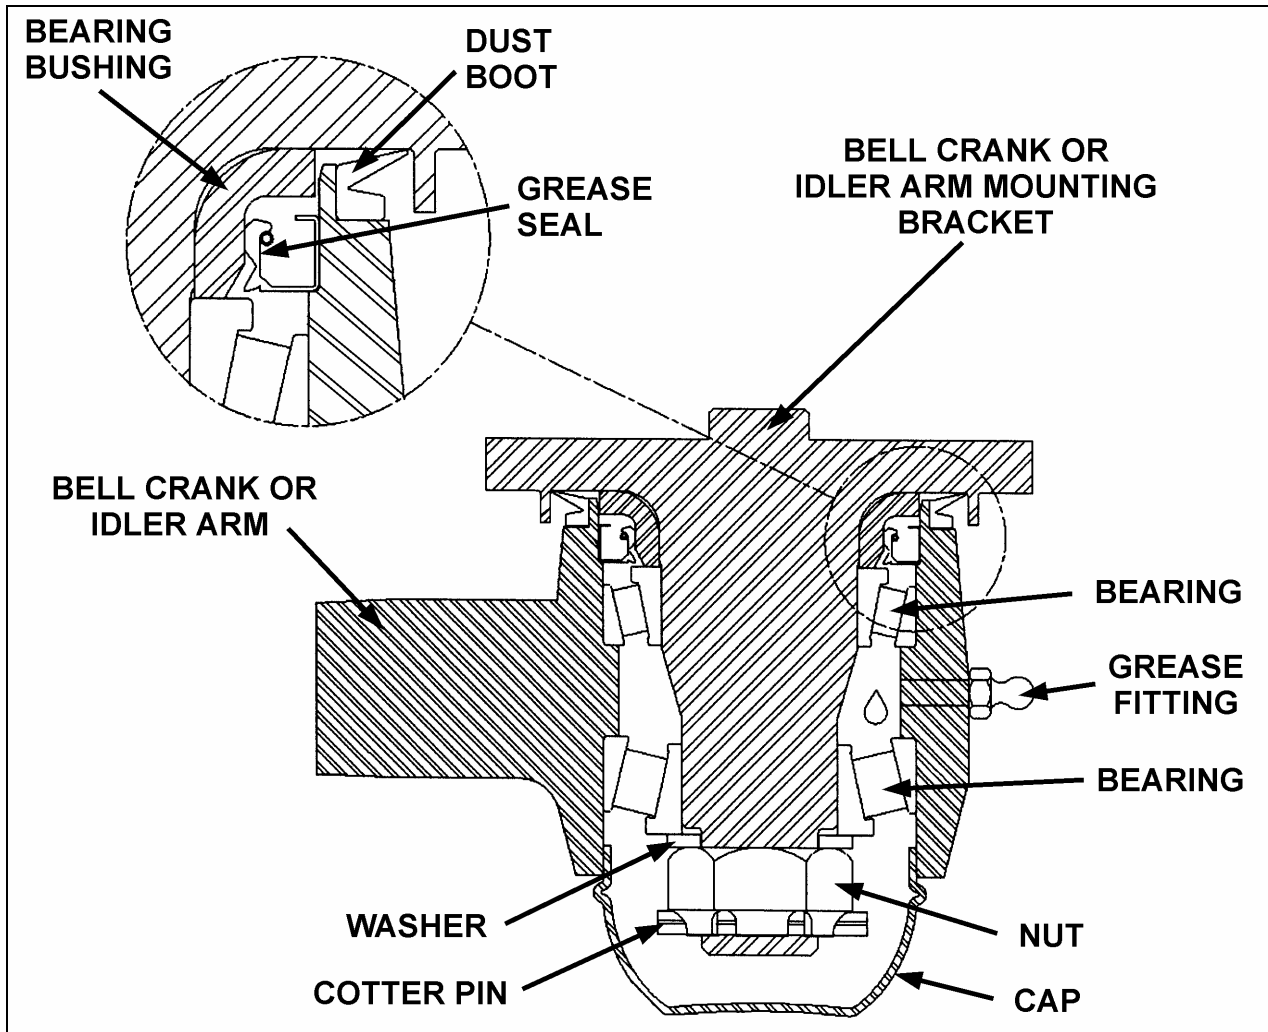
BELL CRANK AND IDLER ARM 16109
